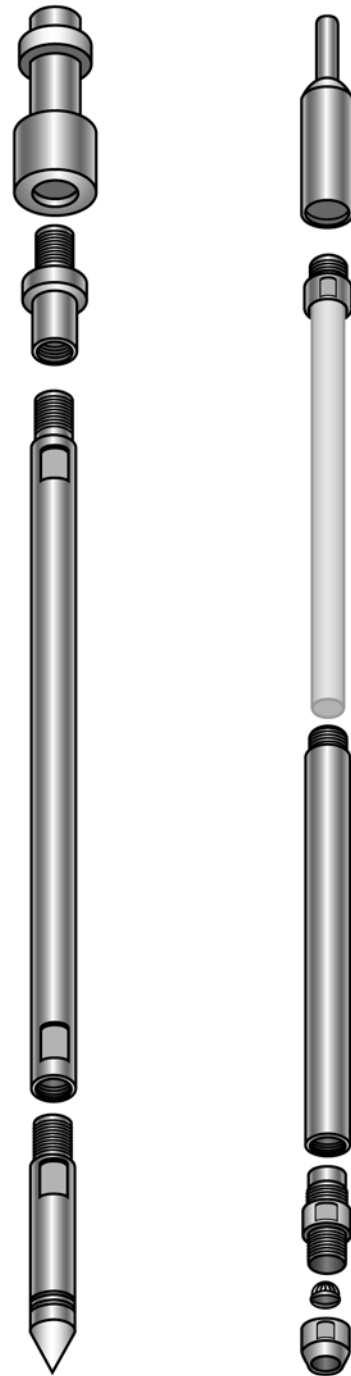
Depth-Specific Piston Sampler (Guide D6282)
